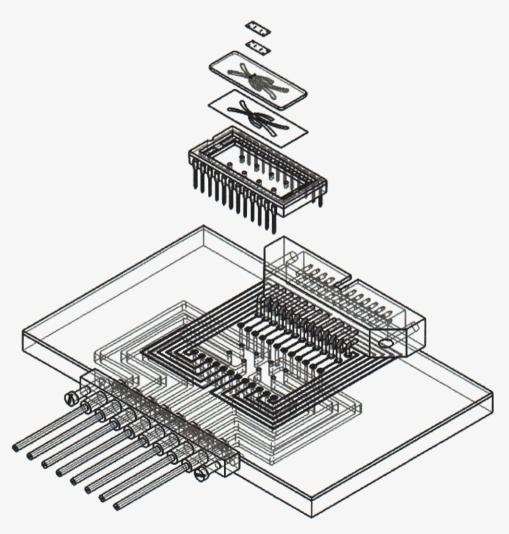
Orientation of the EMDIPTM piece parts as assembled to the FPWB.
